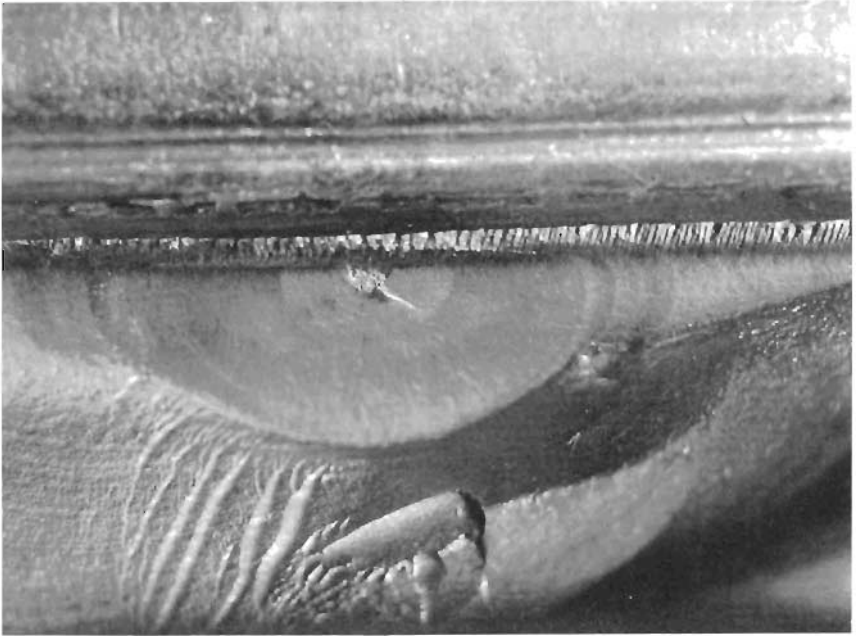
Spur pinion, 100 \times . Tooth bending fatigue at mid-length of tooth at root radius, but origin is at an inclusion located in the case/core transition.
